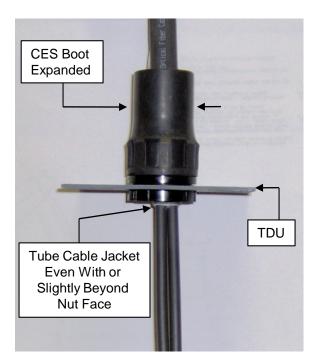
A TC02TP2 Tube Cable Ready for CES Installation
